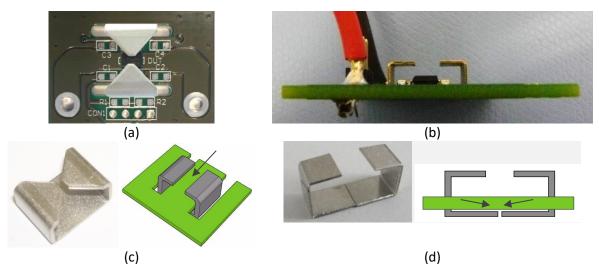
Top (a) and side (b) view of the full system. (c) Shield in one piece inserted through slots on the PCB edge. and (d) shield in two parts inserted in PCB slits and assembled together.
